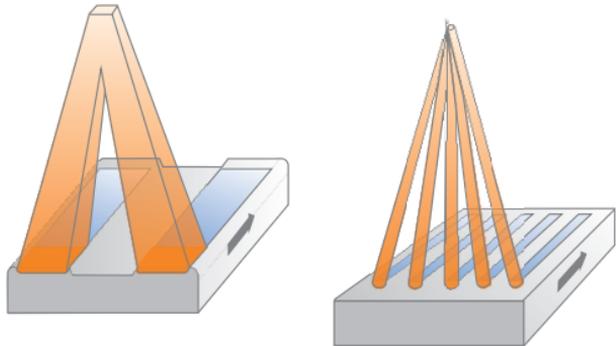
Elimination of hot tear cracks by use of two heat zones running in parallel to the weld.
